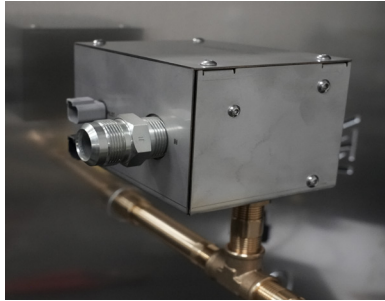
Connecting the Flared Fitting to the Carbon Valve
